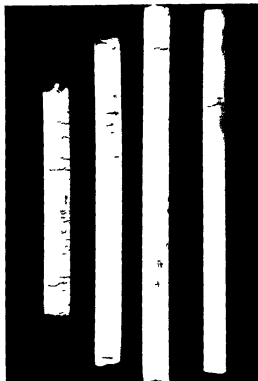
Fatigue cracks in 18-8 tubes which operated in condenser of exchanger units without adequate freedom for expansion of the tubes. (Repickled to show cracks)
